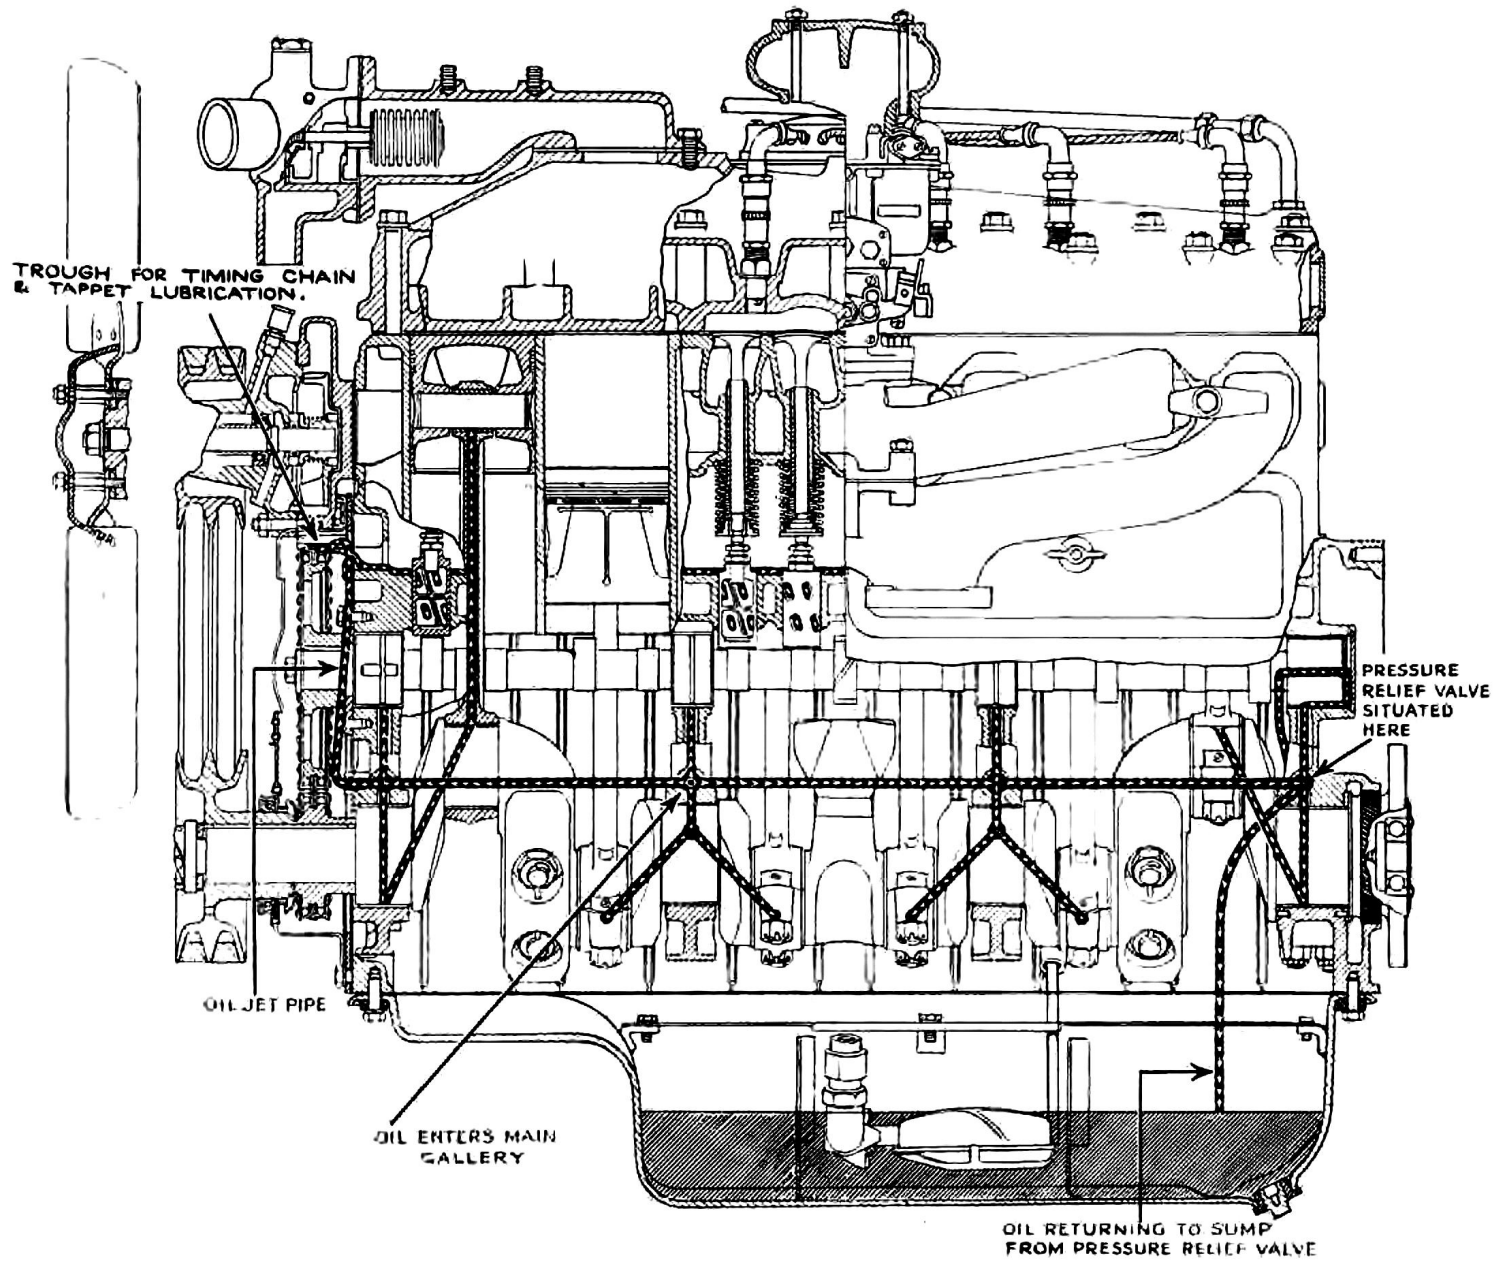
ENGINE LUBRICATION SYSTEM—LONGITUDINAL SECTION
